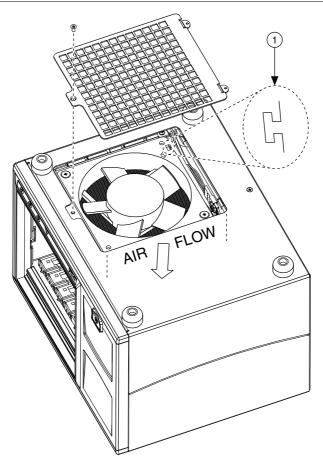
9-Slot Chassis Fan Cable Inline Connector
